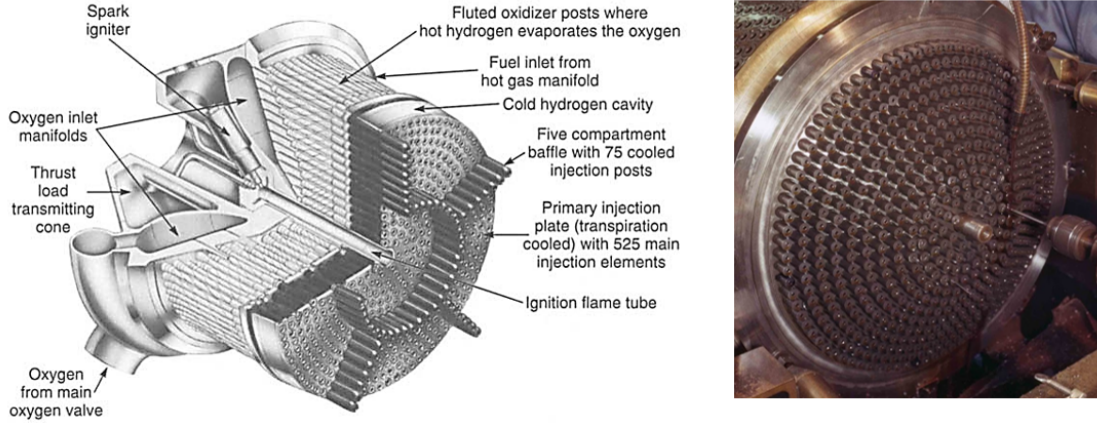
Space shuttle main engine (RS-25) injector plate containing hundreds of shear coaxial injector elements. *Left*: Main injector system assembly showing inlet manifolds and baffles (from Ref. [128]). *Right*: Image of injector plate during manufacturing (from NASA.gov).
